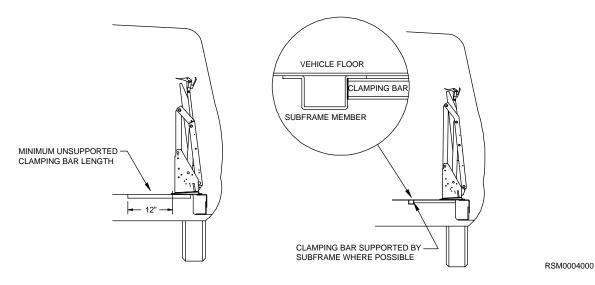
FORD VAN CLAMPING BAR ARRANGEMENT
